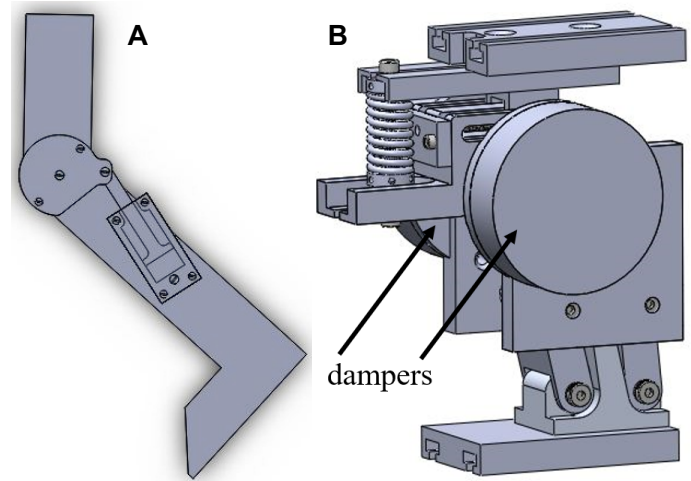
A. Two-dimensional model of linear damper connection geometry. B. Three-dimensional model of rotary dampers incorporated into the final design
